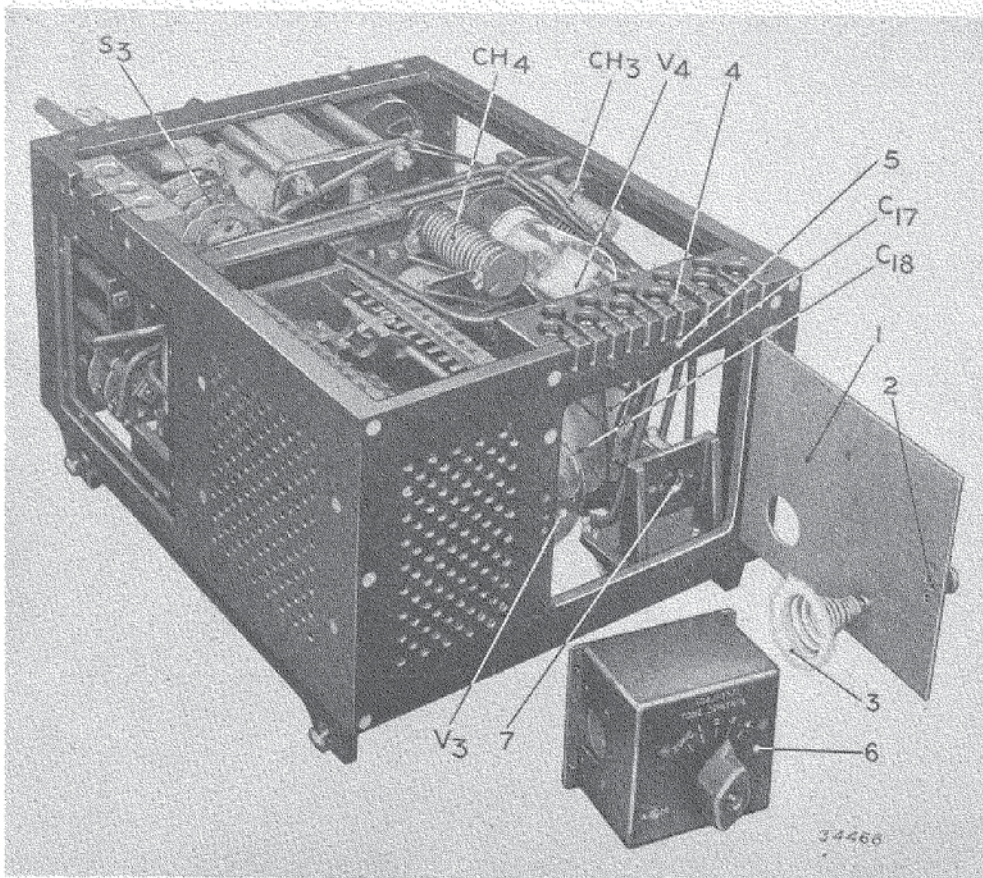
TOP MEMBER, REAR VIEW WITH TONE CONTROL UNIT
